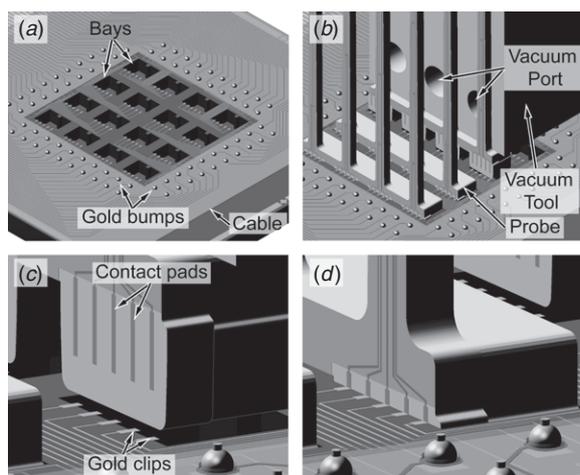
Assembly procedure of probe combs into the platform using a flip-chip bonder: (a) ribbon cable attached using the *MicroFlex* technology; (b) the probes are inserted with a vacuum tool into the bays of the platform; enlarged view of the probe base (c) before and (d) after insertion. The overhanging gold clips are bent down upon comb insertion. The electrical contact between electroplated contact pads and gold clips is achieved by mechanical caulking.
